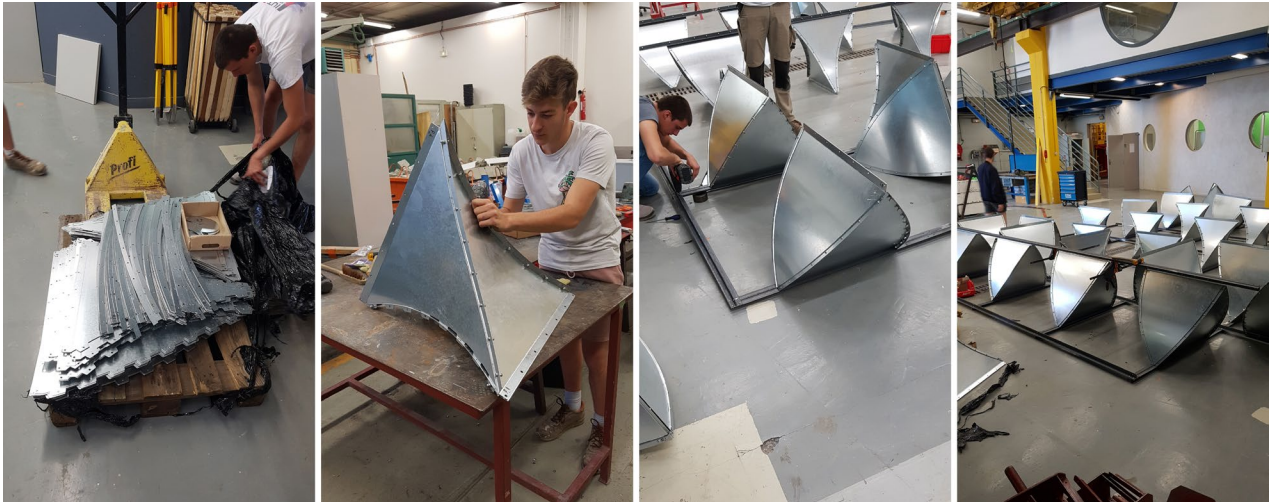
Assembly steps of the prototype. Left: One pallet is sufficient to hold all the sheet metals of the modules. Middle left: Pre-assembly of a concave module. Middle right: Assembly of the modules on the lower grid is carried out on the ground. Right: Assembly of the upper grid on the modules.
